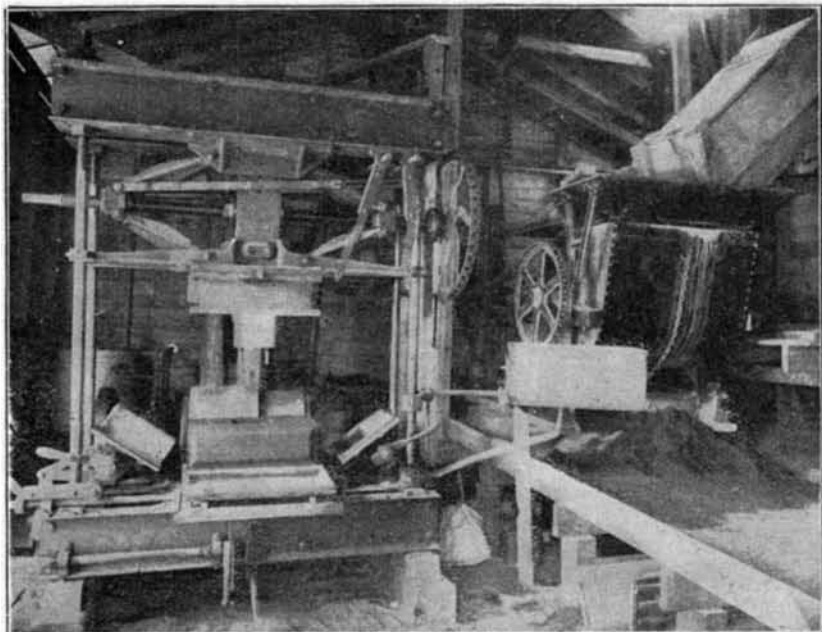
Power Machine. Corner Panel Block Ready for Removal.
